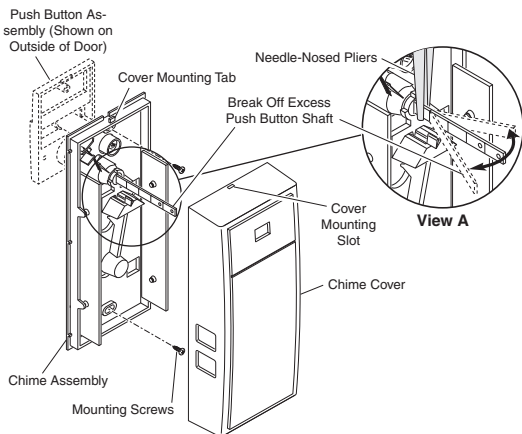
Mounting Chime Assembly and Attaching Chime Cover
